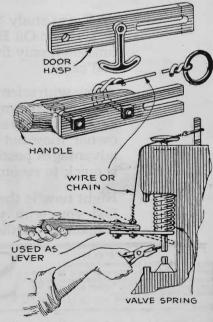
Easy to make a valve lifter at home with hammer handle, bolts, ring, and bit of wire.
